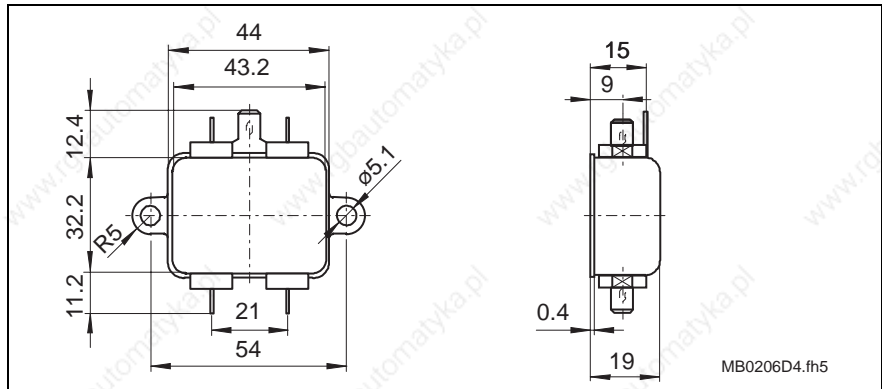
Dimension drawing: line filter NFE01.1-250-006
